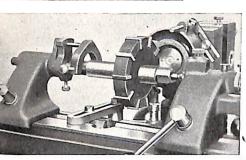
(above).—Grinding inserted-tooth milling cutter with cup wheel on Jones & Ship man grinder
